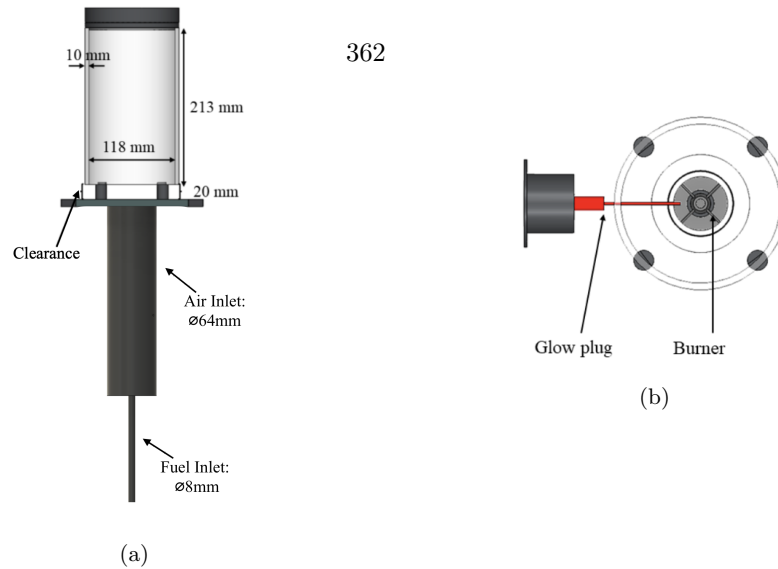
a) CAD of Chamber, Fuel & Oxidizer inlet and b) Top view of the burner CAD model
